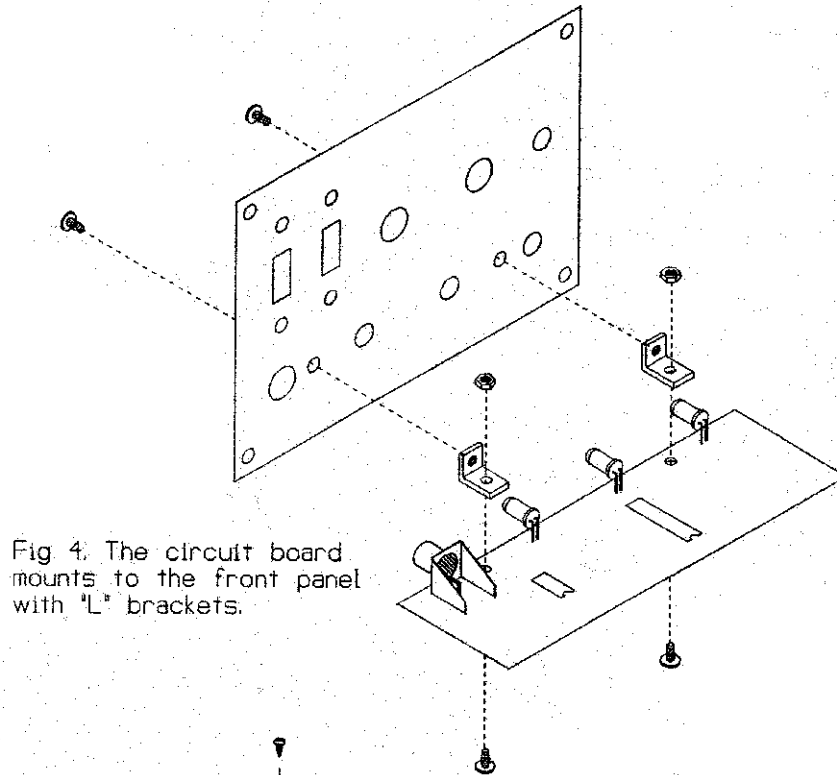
The circuit board mounts to the front panel with "L" brackets.
